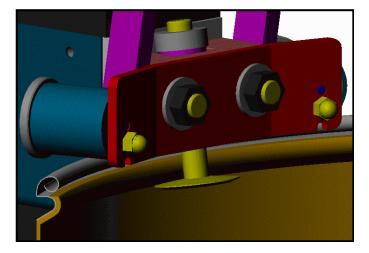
Second Cut, Bottom of Drum & Only Cut, Top of Drum.
